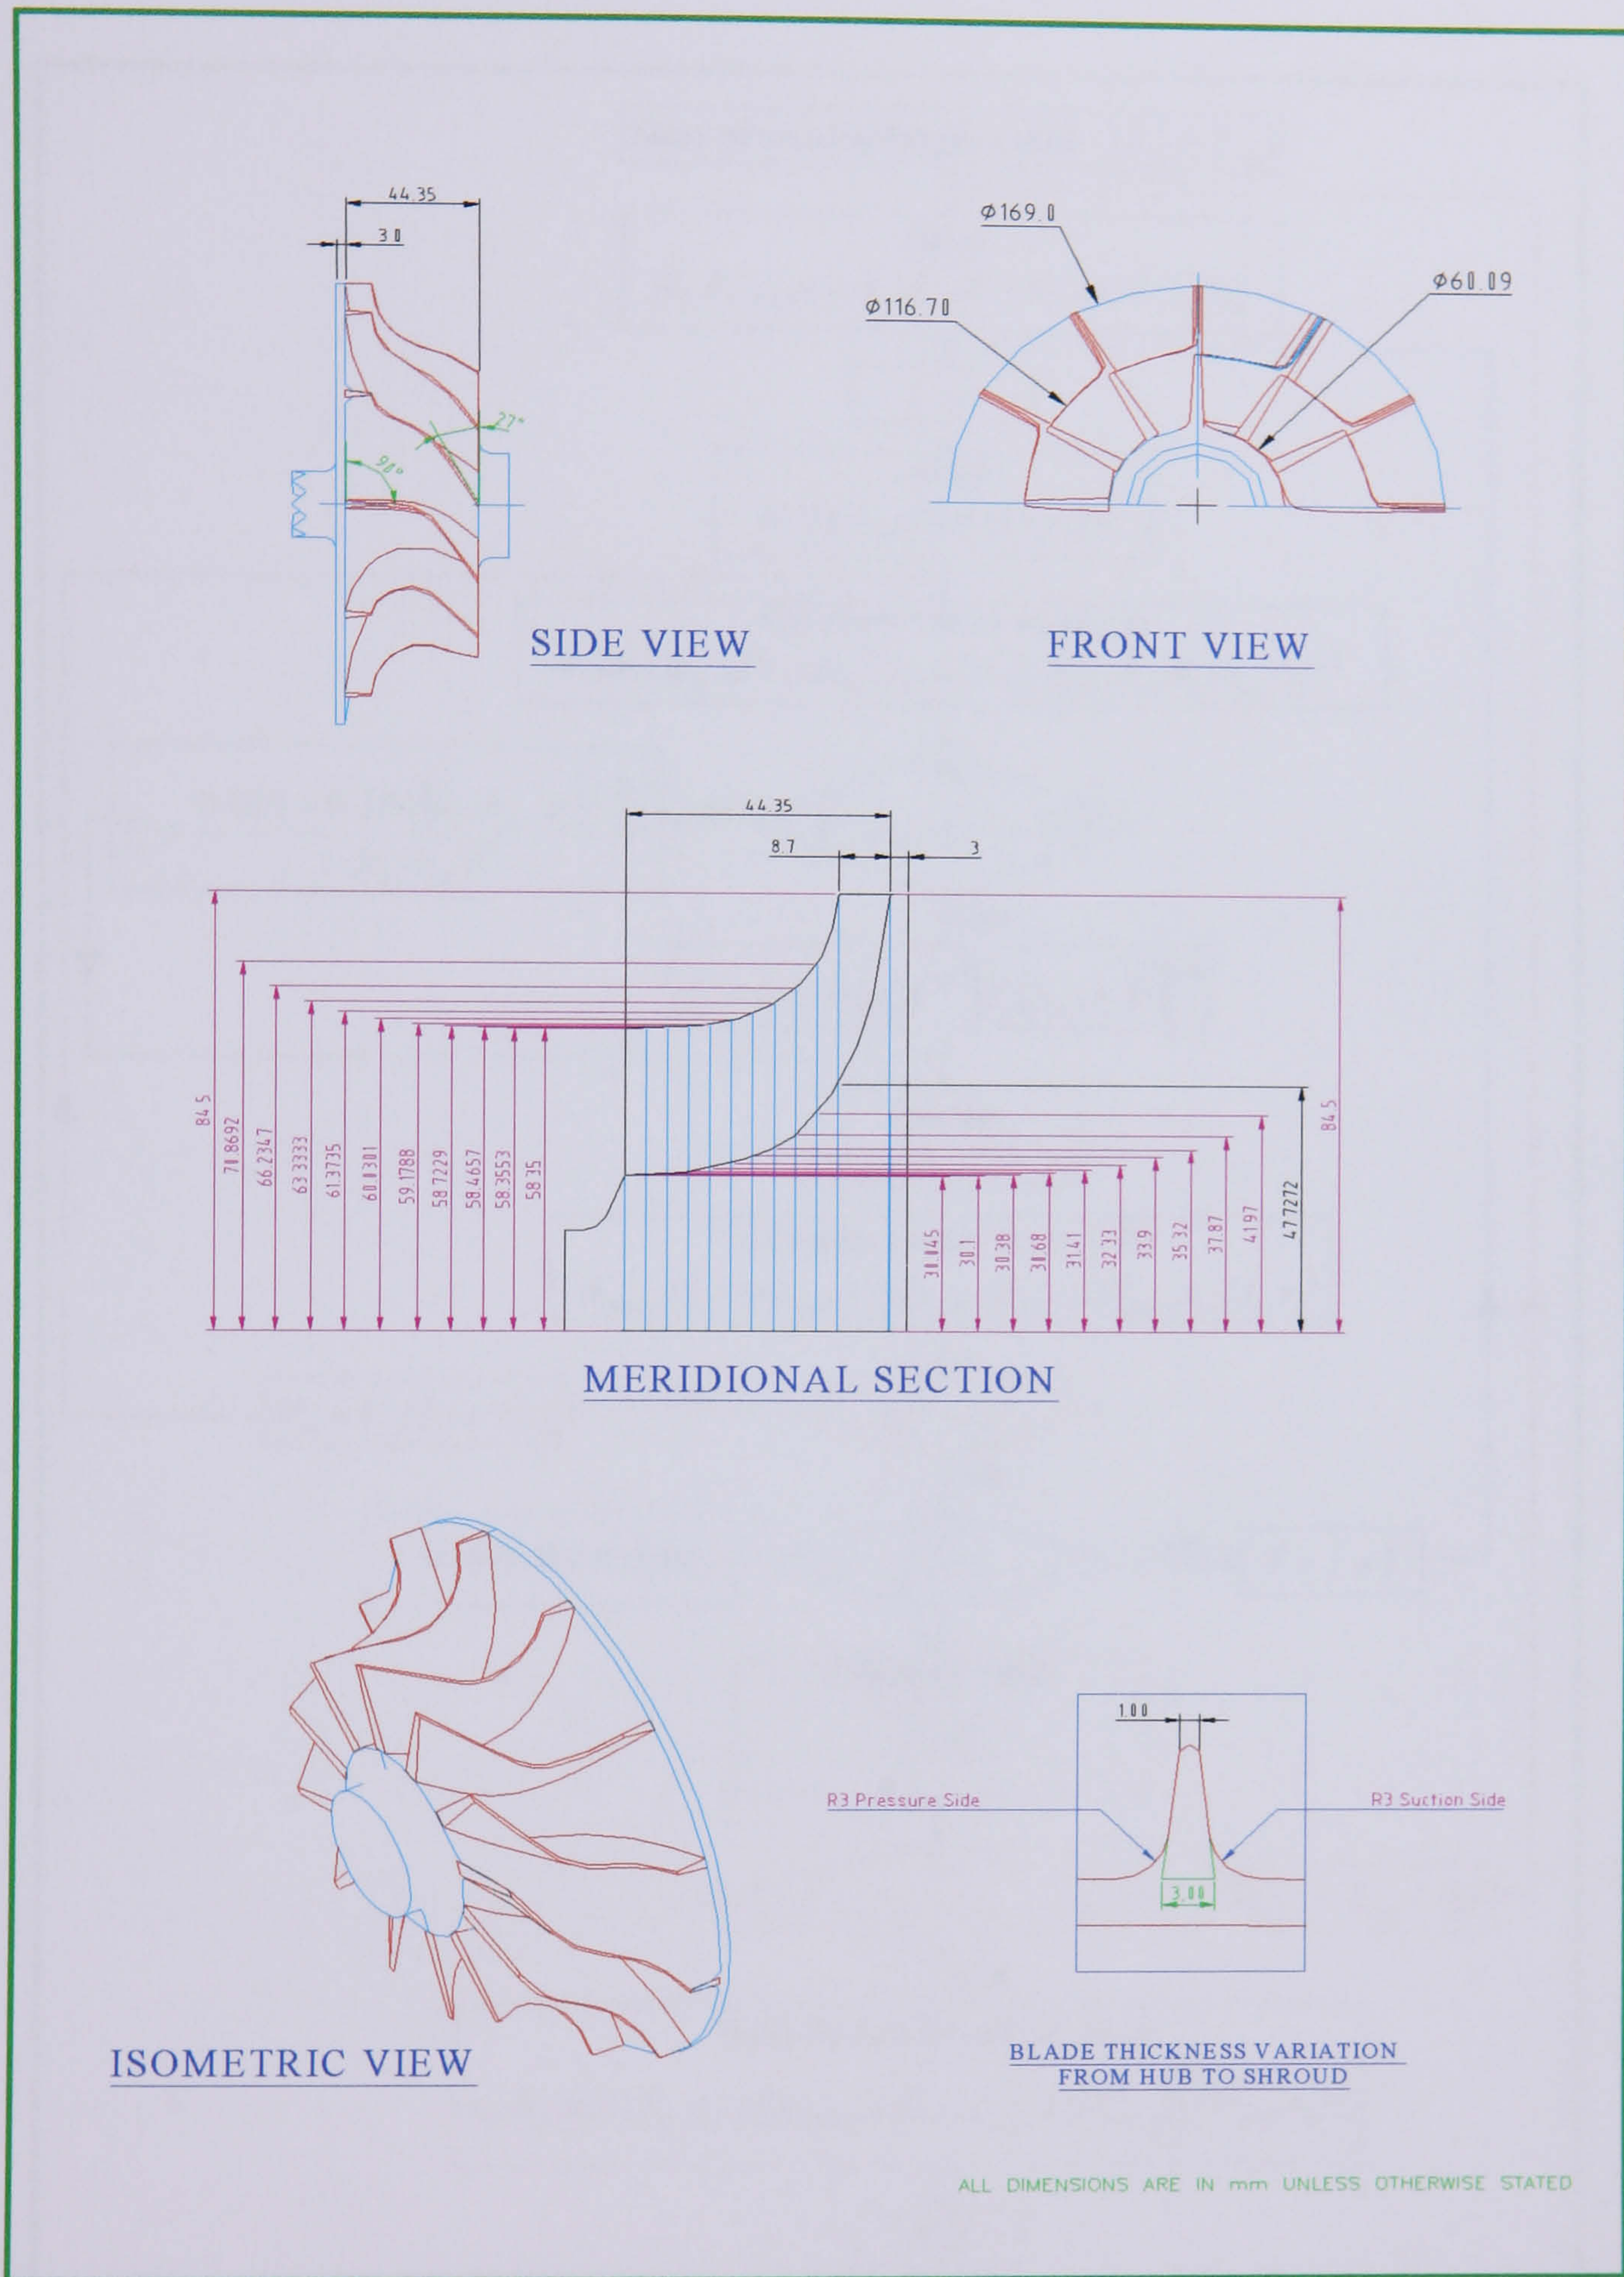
DETAIL DRAWING OF THE DESIGNED TURBINE ROTOR
